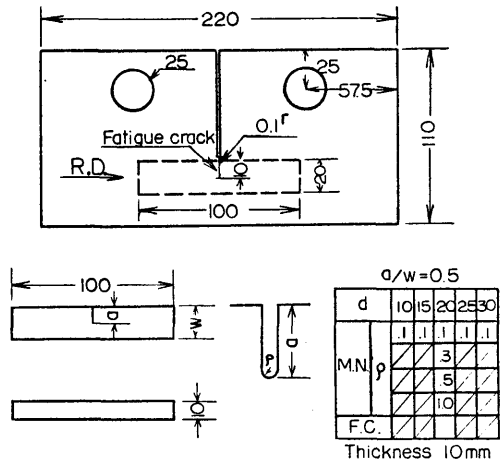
Shapes and dimensions for fatigue-cracked and notched specimens.
